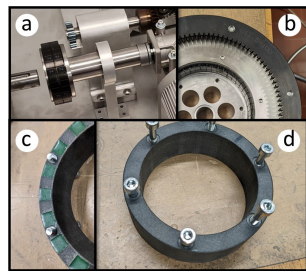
Components of the prototyped magnetic gear: (a) magnets, (b) inner rotor, (c) poles rotor back and (d) poles rotor front.
